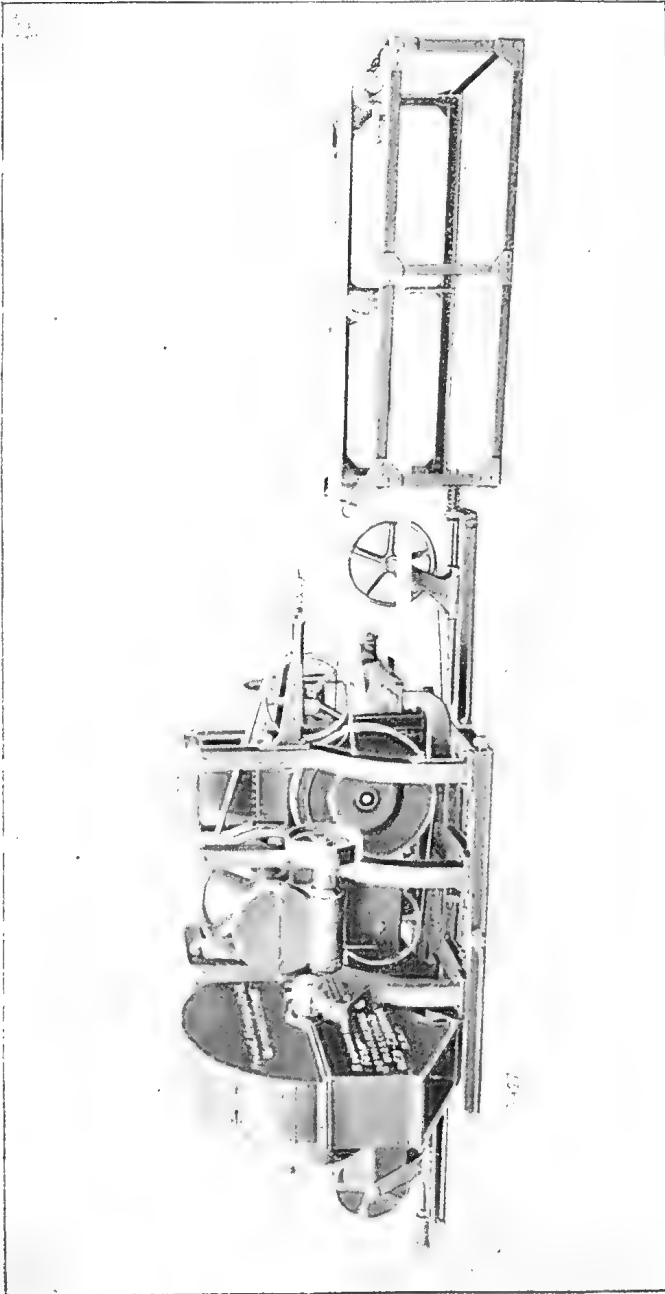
NEW CORONA FIBRE-EXTRACTING MACHINE, WITH BAND CONVEYORS.
